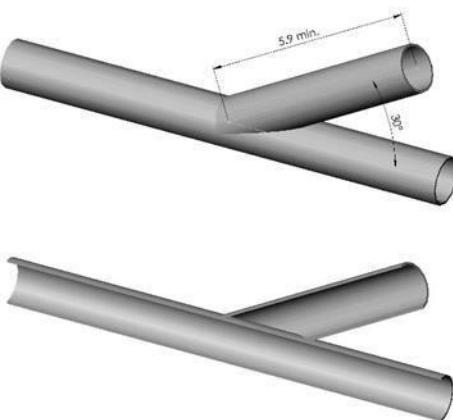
Roll Cage, Welding Sample 2
